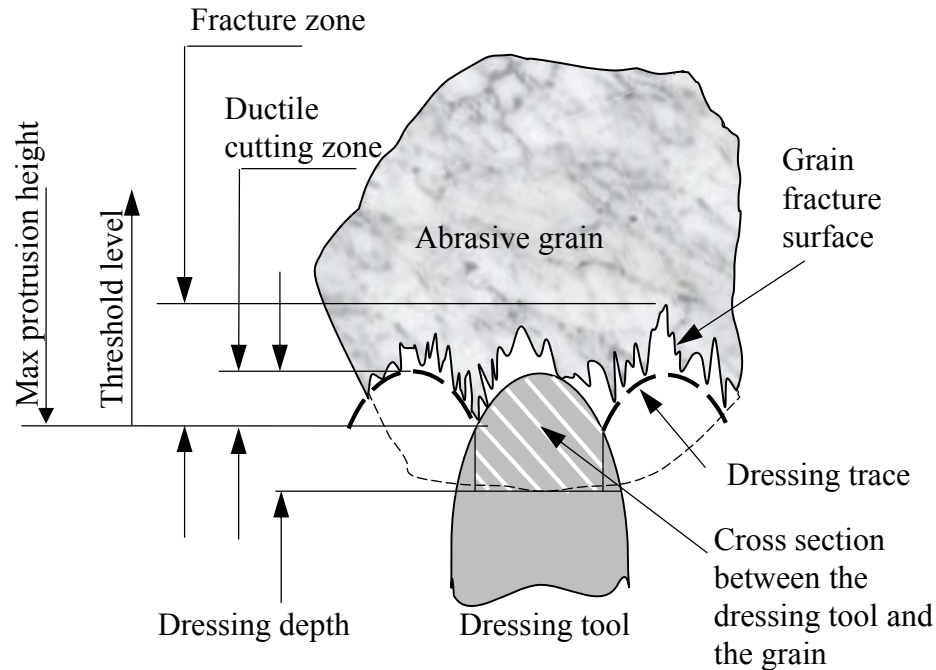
Illustration of grain fracture by single-point dressing tool.
